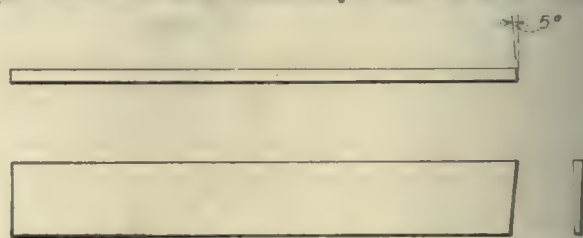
FORM TOOL FOR LIP "E" ON BACK OF PLUG
